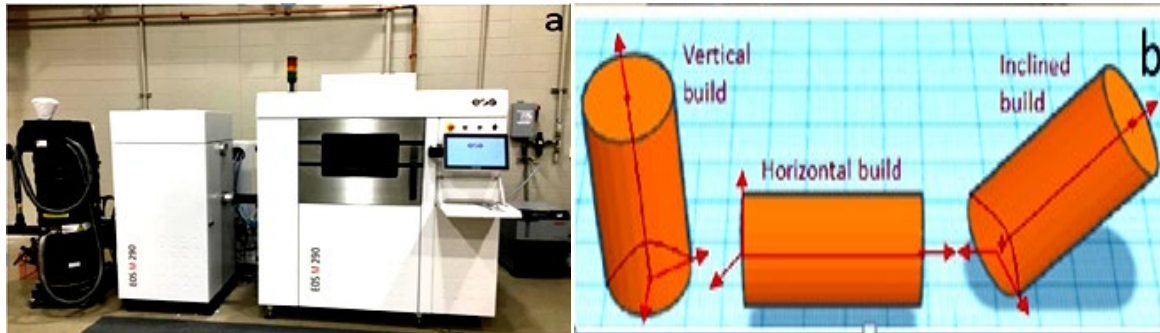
(a) Metal 3D printing machine used and (b) Build geometry, Pooja Angolkaret.al
